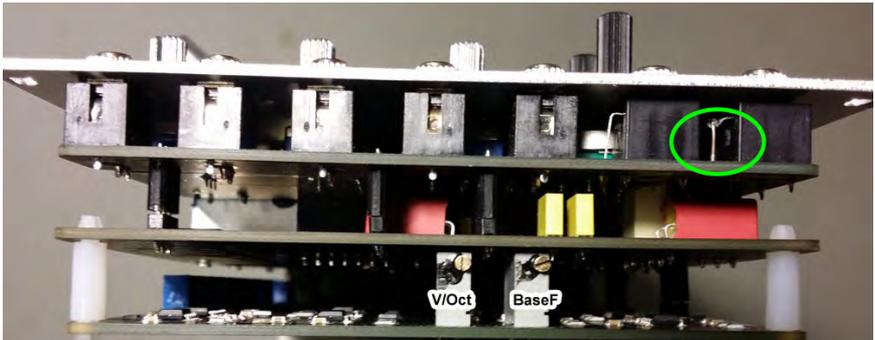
, Side of INM-E showing V/Oct and BaseF trimmers, and alternate Common reference point.
